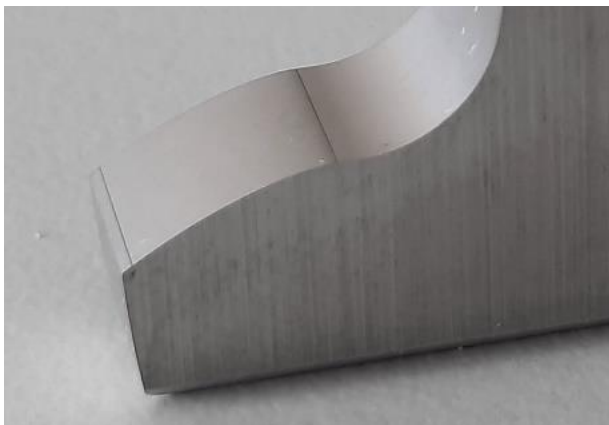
Prototype for gear tooth roughness standard with laser marks – tooth width, 5 mm; measurement path between laser marks, 6 mm.
